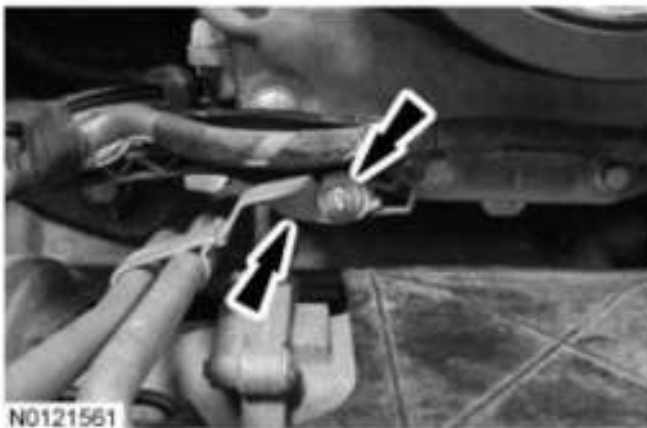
Locating Transmission Cooler Line Bracket And Nut
